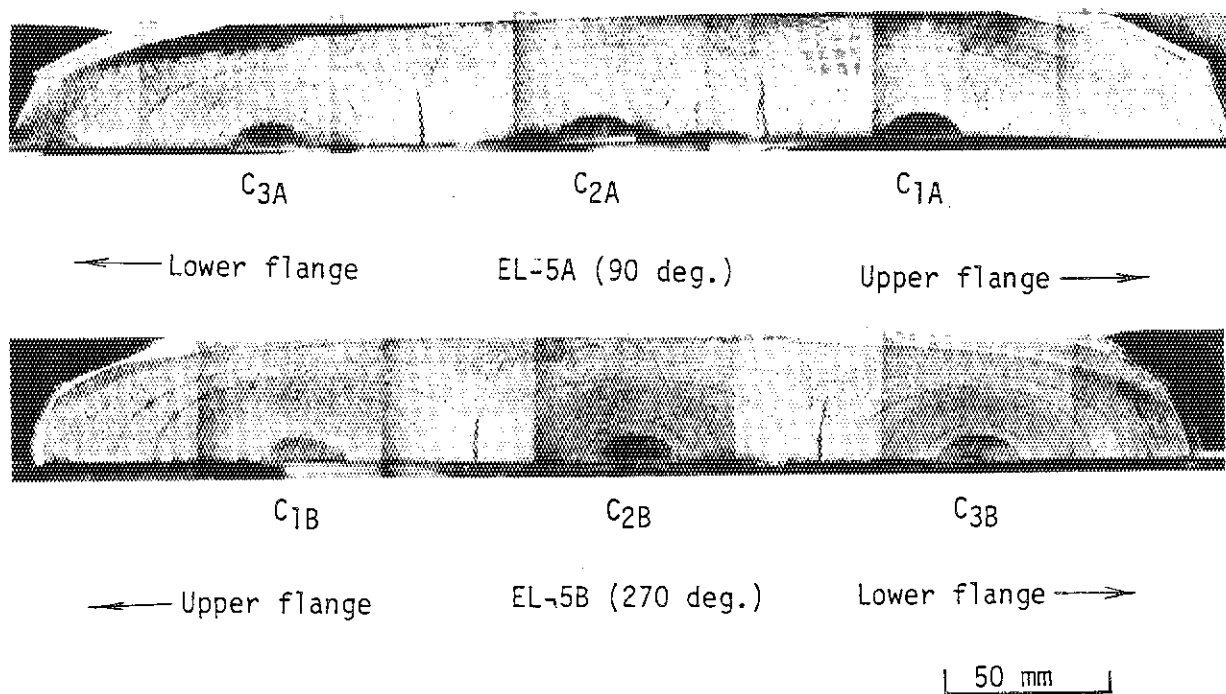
Fracture surface of EL-5 test pipe
